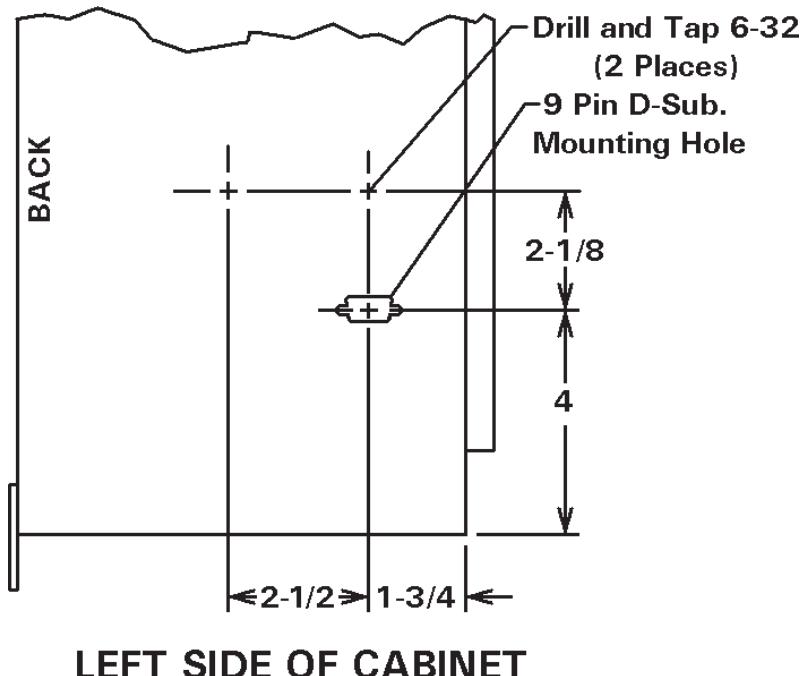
RS232 mounting in 24" x 16" x 8" cabinets
